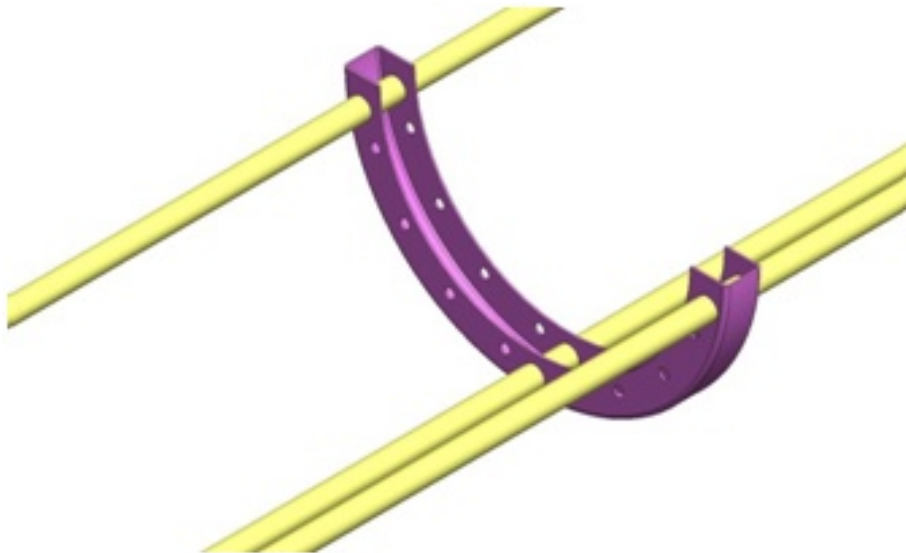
Miniature tube carriers adapter with holes for the cooling gas
